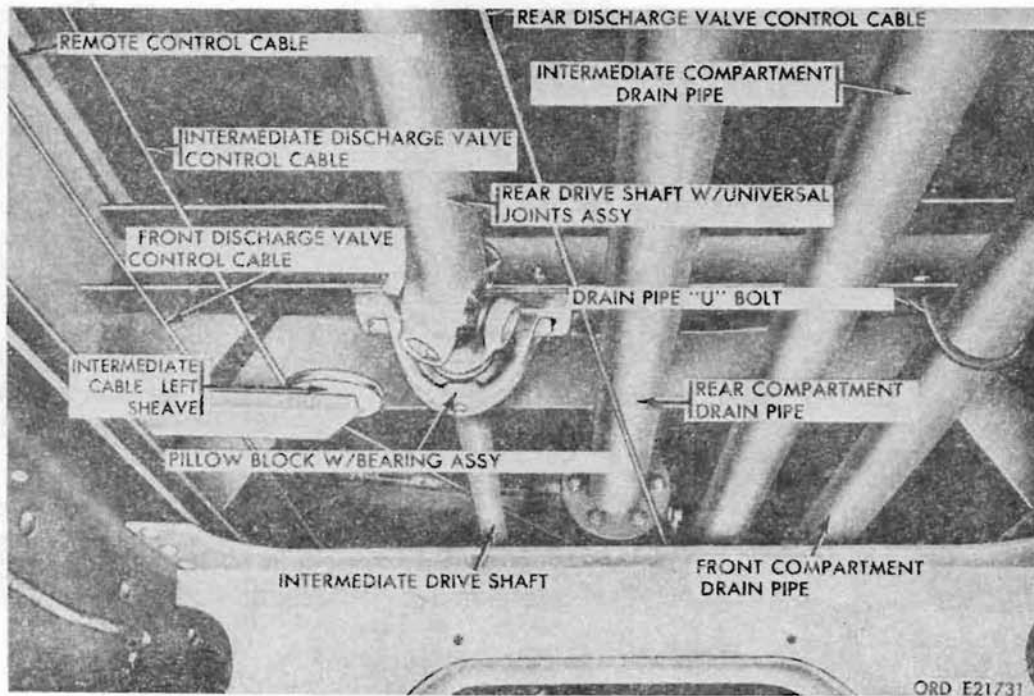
Fuel tank body discharge valve control cables, compartment drainpipes, pump drive shafts, and pillow block with bearing assembly
